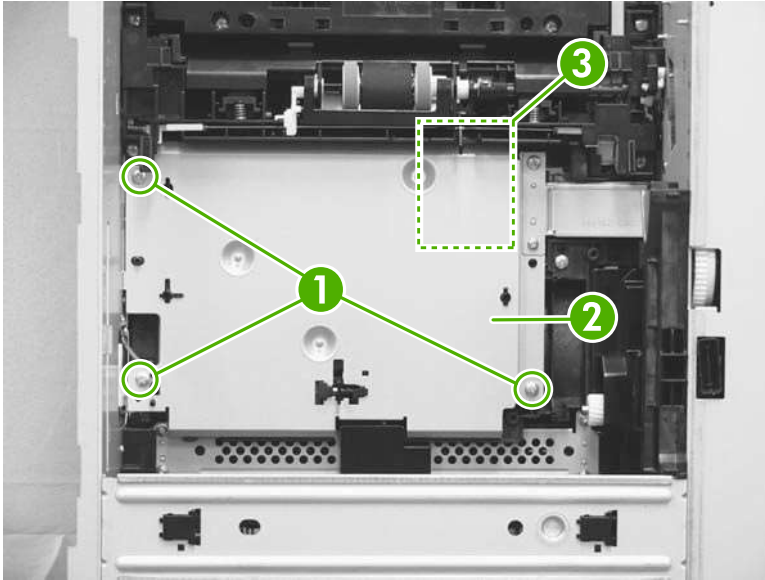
Remove the high-voltage power supply (9 of 11)
